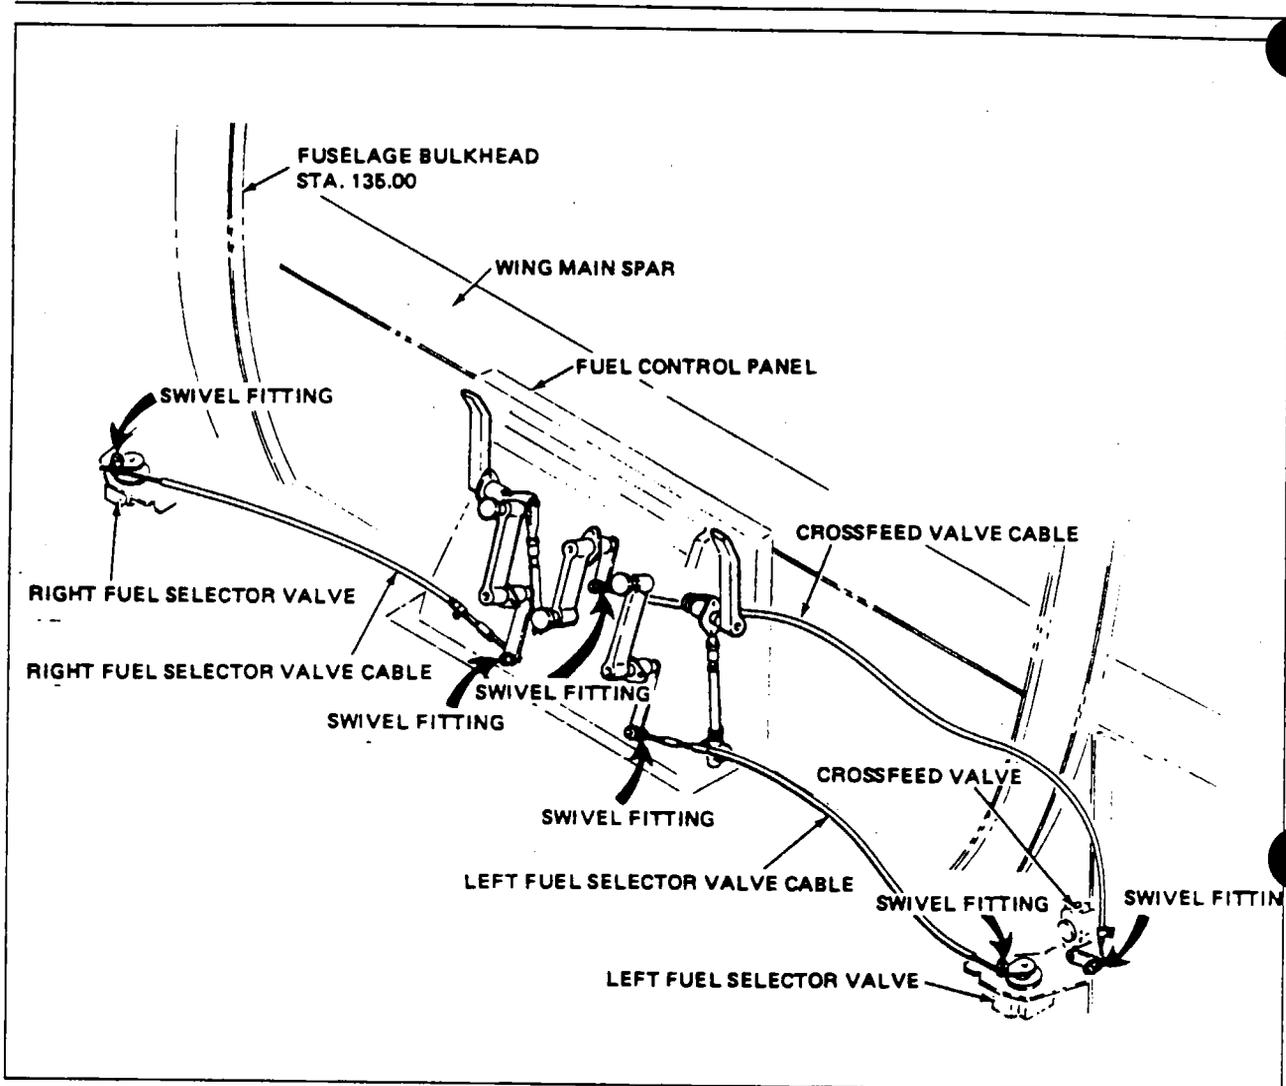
Fuel Selector and Crossfeed Valve Control Cables.
